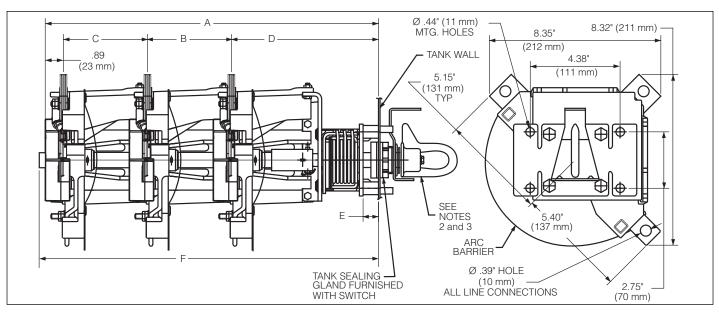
Line illustration with dimensions of sectionalizing switch with "Bolt-In System."
